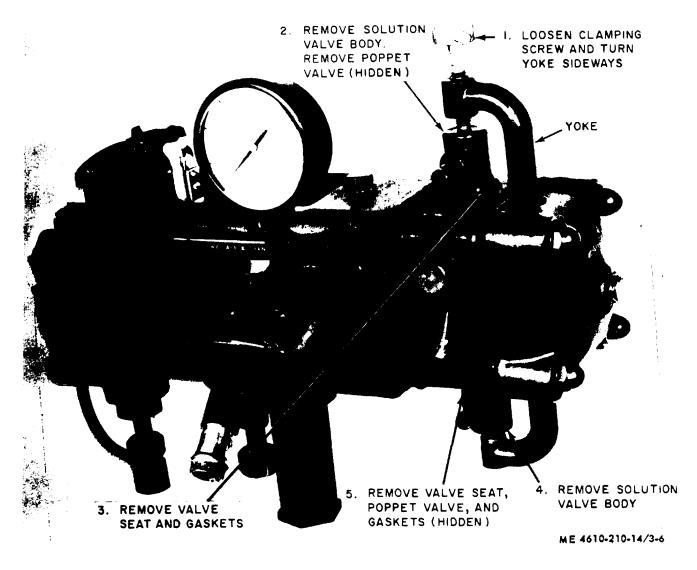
Solution valve body, poppet valves and valve seats, removal and installation.
